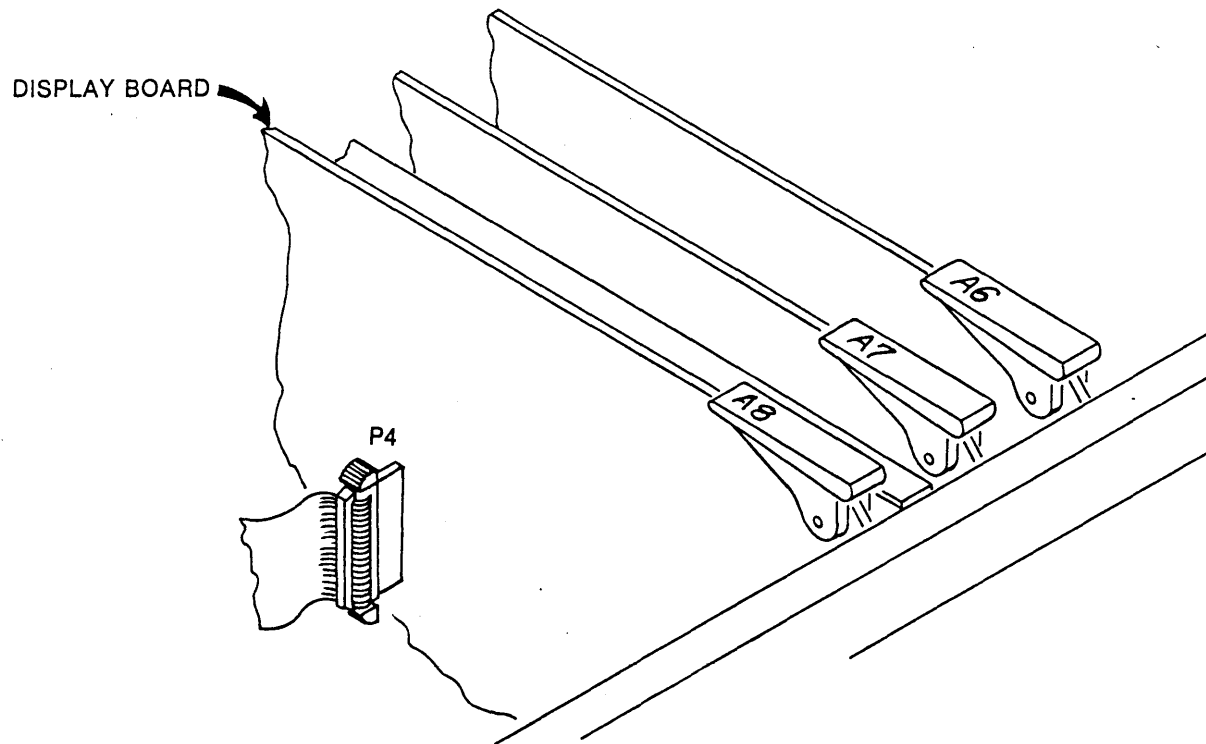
Disk Drive I/O Ribbon Cable Connection
